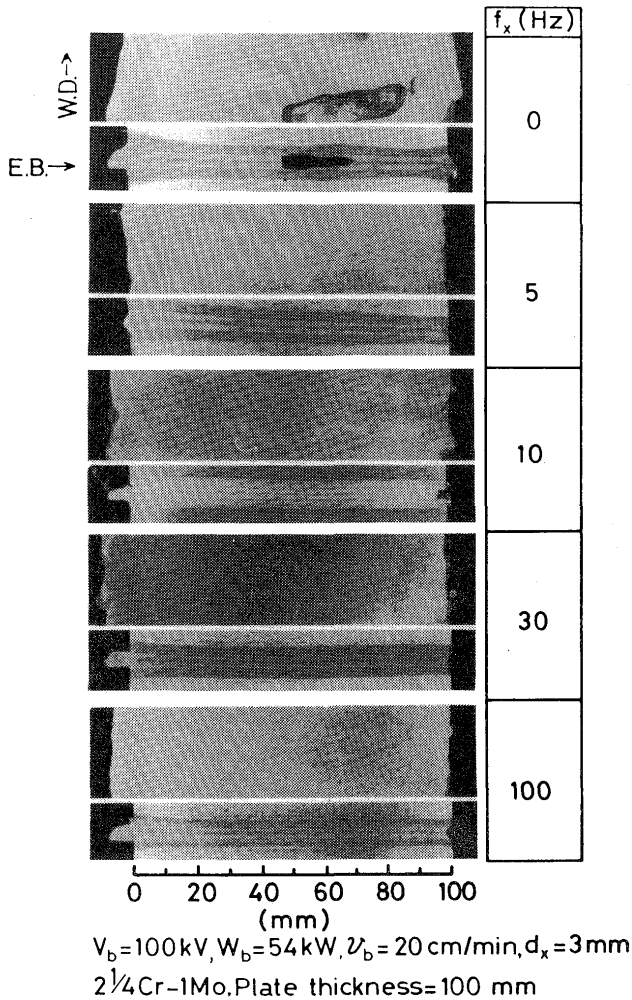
Fully penetrated bead sections of horizontal position welding with various beam oscillation frequency.
